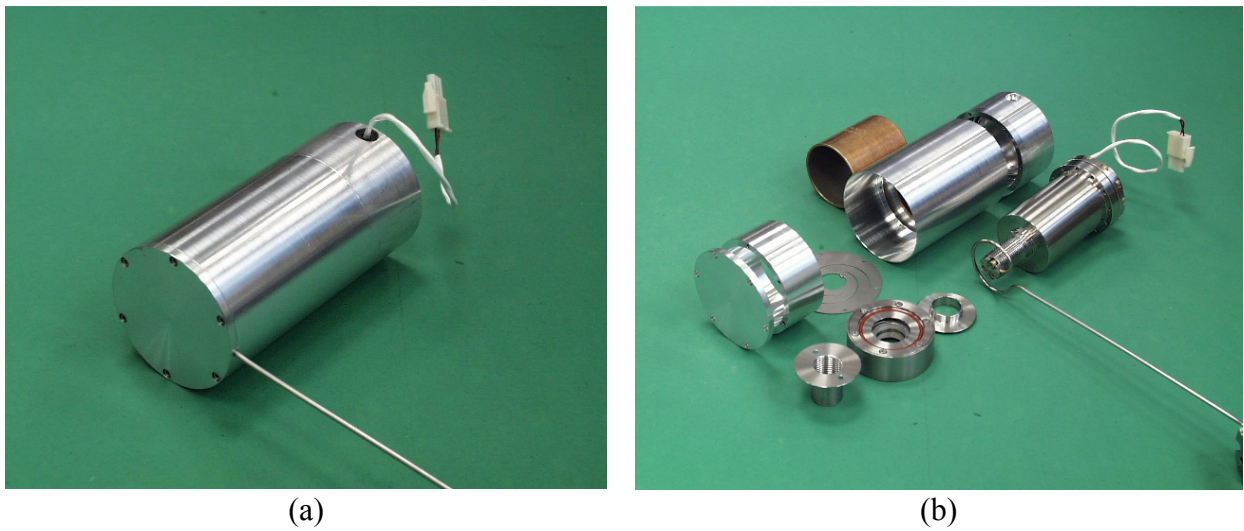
Bushing-mounted compressor, (a)-outline view, (b)-parts view
